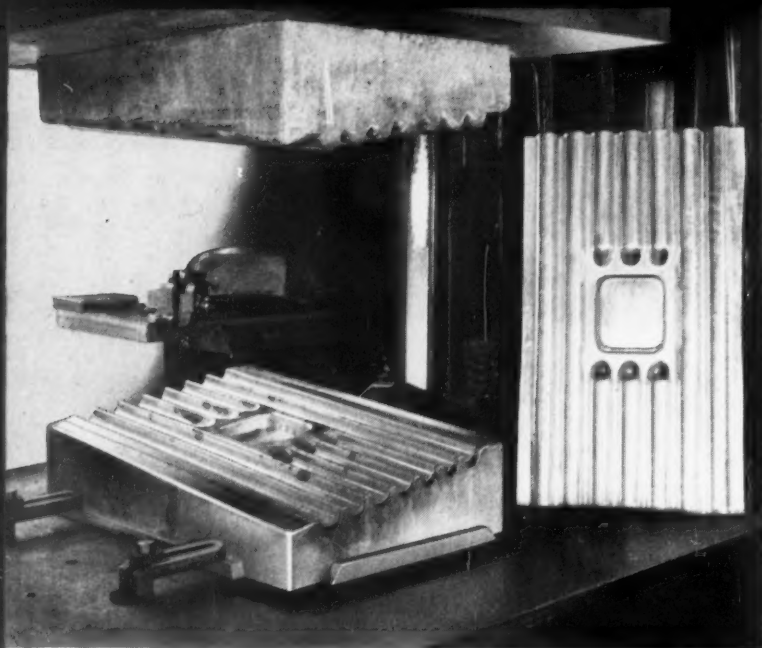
(Above Right) Huge Hydraulic Press that Develops a Pressure up to 4500 Tons for the Forming of Sheet-metal Pieces over Masonite Forms
